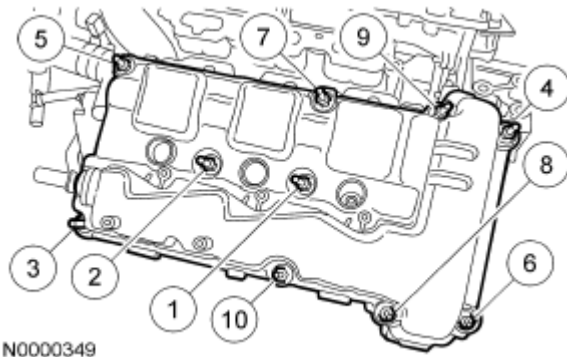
Identifying Tightening Sequence Of Valve Cover Bolts & Studs
